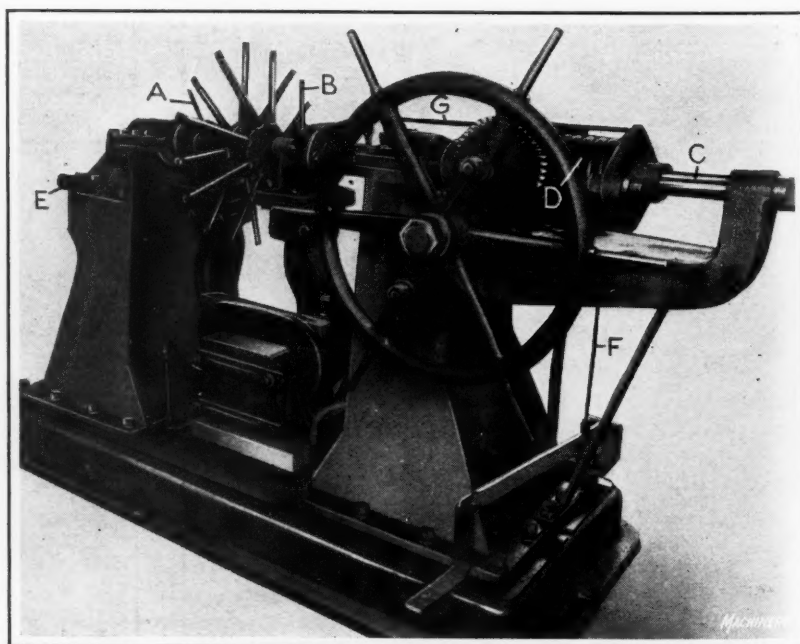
Another View of Butt-welding Machine shown in Fig. 6
